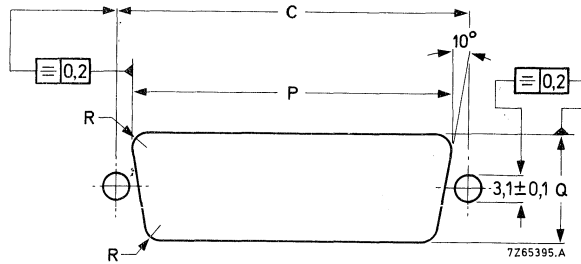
Rear mounting; see Table 5 for dimensions C, P, Q and R.
